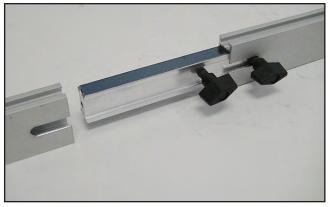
Detail A: Most horizontal extrusion connections have a patented expandable lock. This lock inserts into the groove of an opposing extrusion. Tightening the lock with the hex key tool expands the lock and creates a strong connection.
